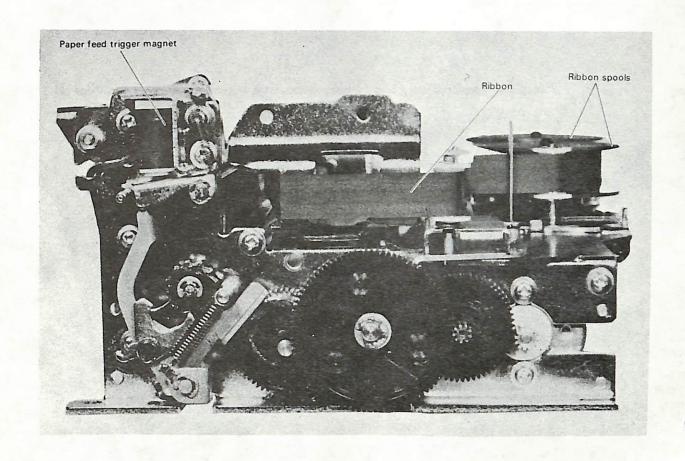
Construction of Model-3110 / Type F (as viewed from the frame A side)
